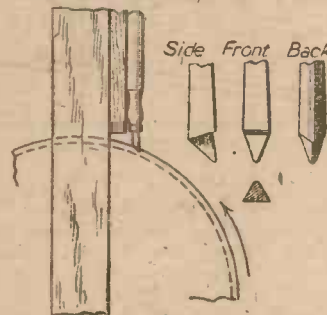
How the belt groove was cut in the wheel, and details of the cutting tool.
